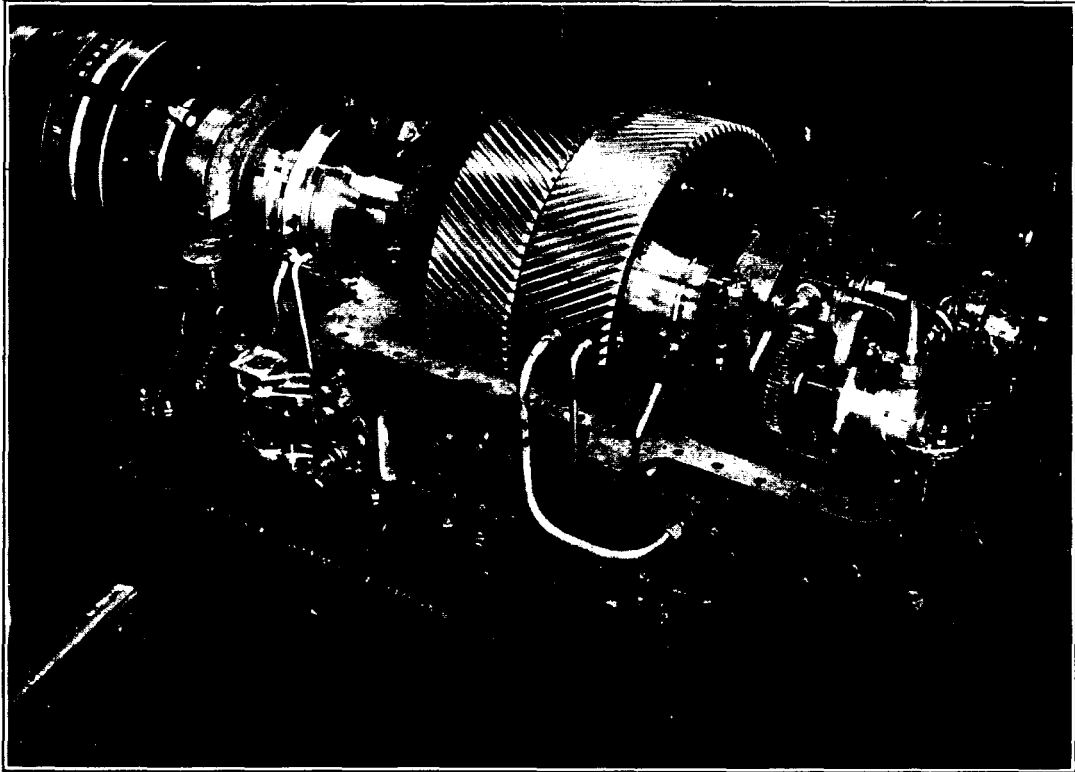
GEAR BOX SHOWING GEARWHEEL
